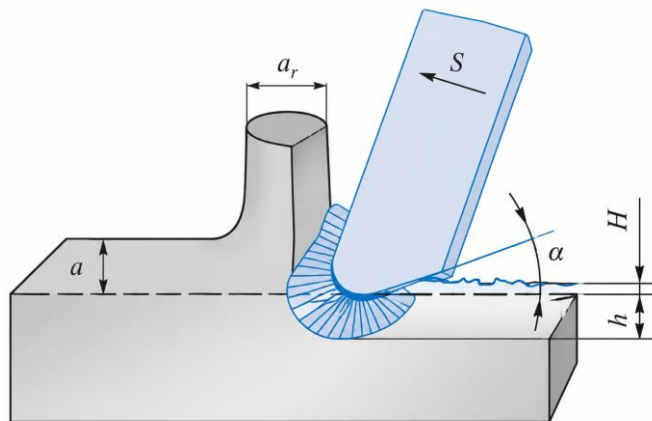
Contact zone between the flank face of the cutting tool and the workpiece during the machining of glass fiber reinforced composite materials.
